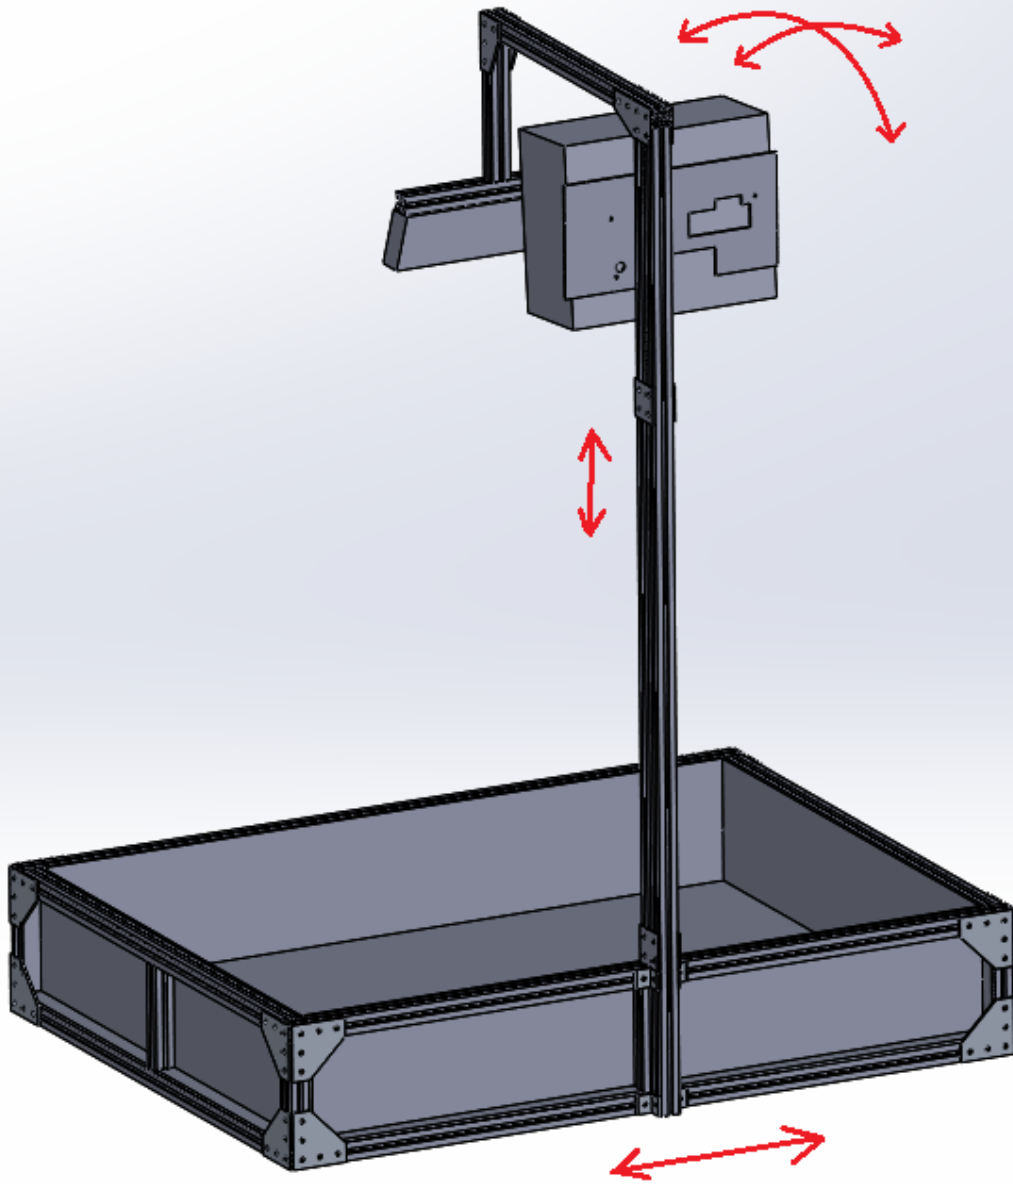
Assembly with Mounted Projector Post and Axes of Motion
